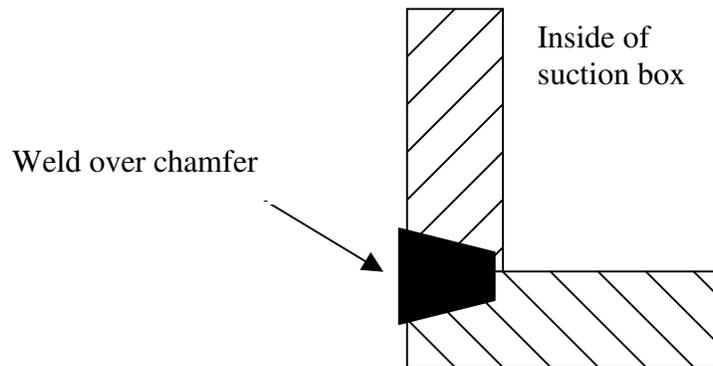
Suggested Cross-section of the Suction Box Welding Arrangement
